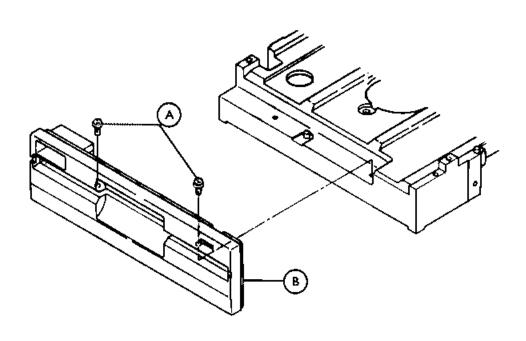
FRONT PANEL REMOVAL/REPLACEMENT
